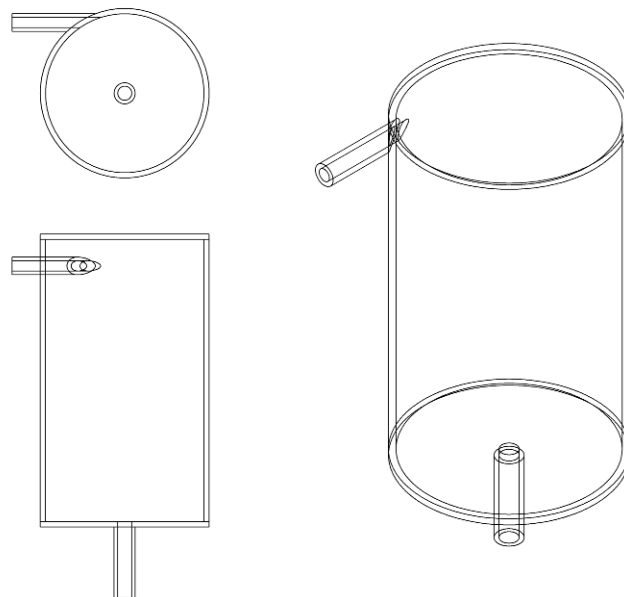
Fluid column test section Geometry #2 with side inlet
